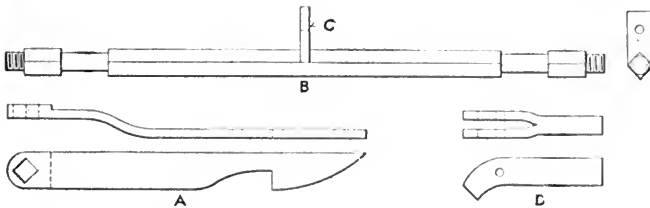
DETAILS OF SKIP-BAIL LOCK.
